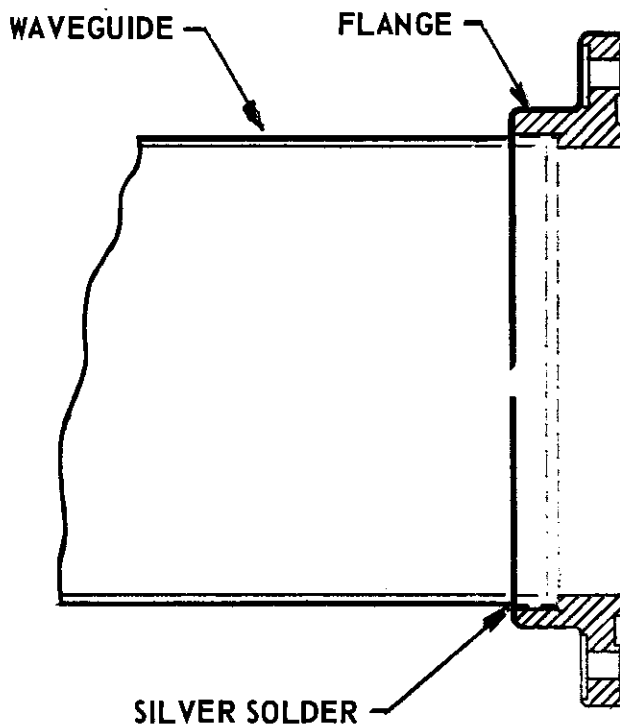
Waveguide and Flange Assembly -Butt Design
